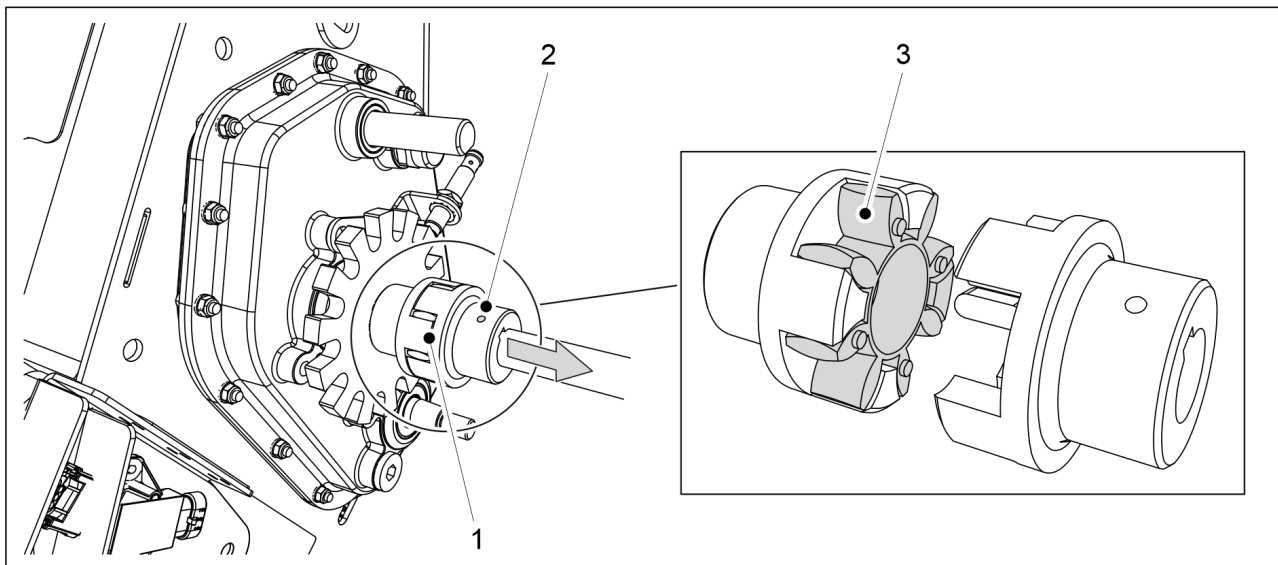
293. Dismounting the clutch flexible coupling element
